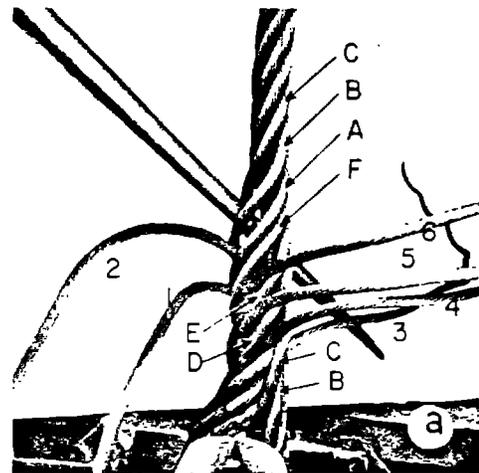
Starting Second Set of Tucks for Strand 3 by Inserting Marline Spike Under Strand C.
